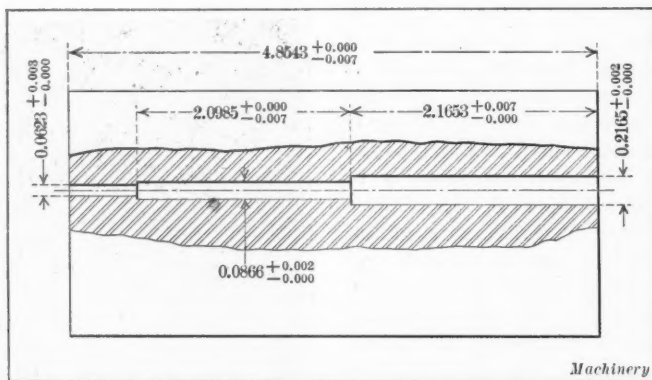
Gun Part drilled in Machine shown in Fig. 38
